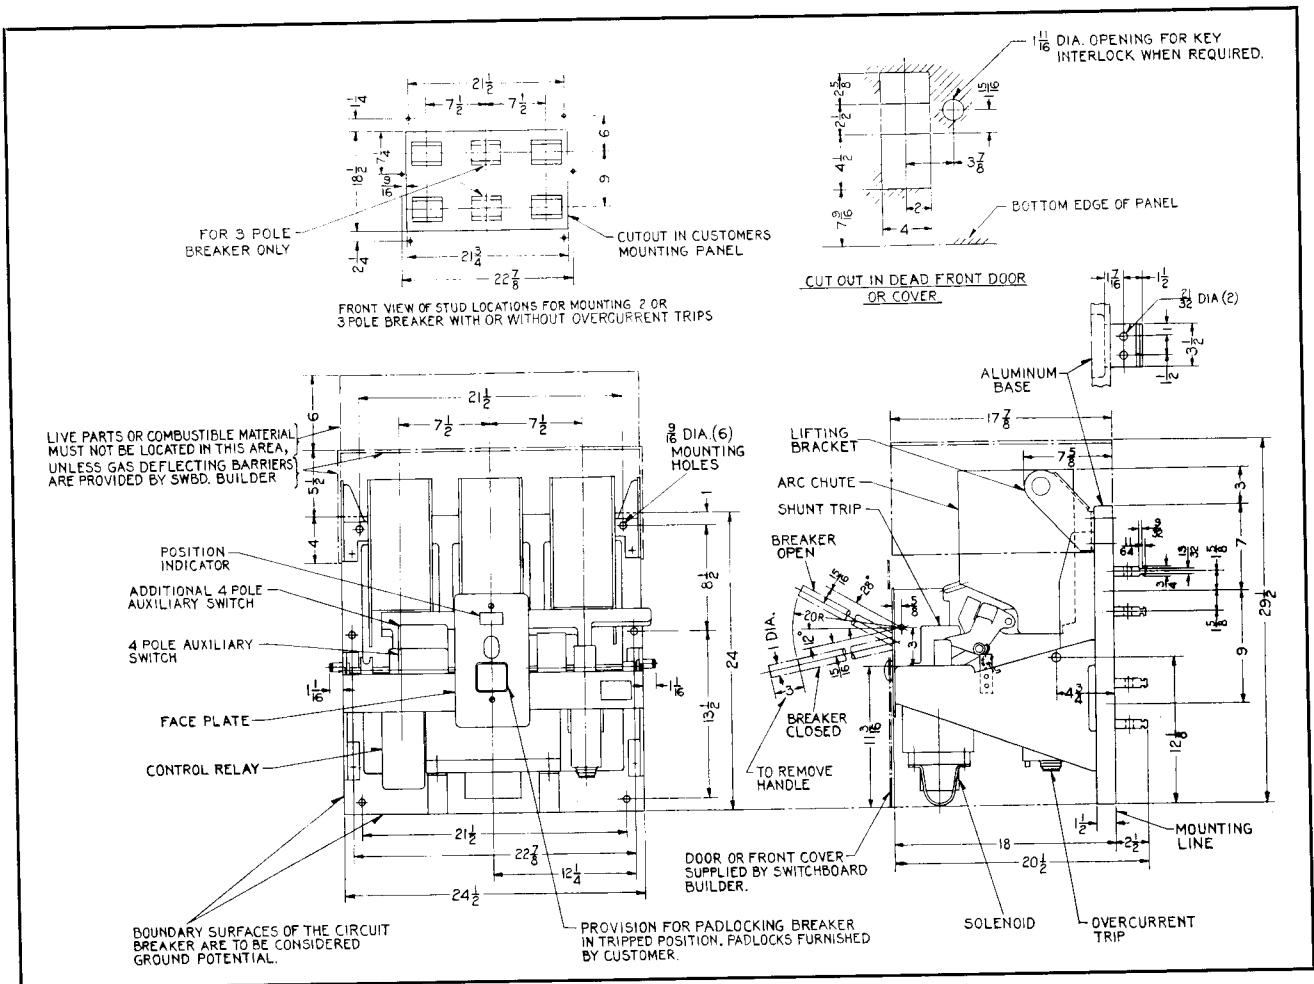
A. Type DB-100 Air Circuit Breaker, Outline and Mounting Dimensions
